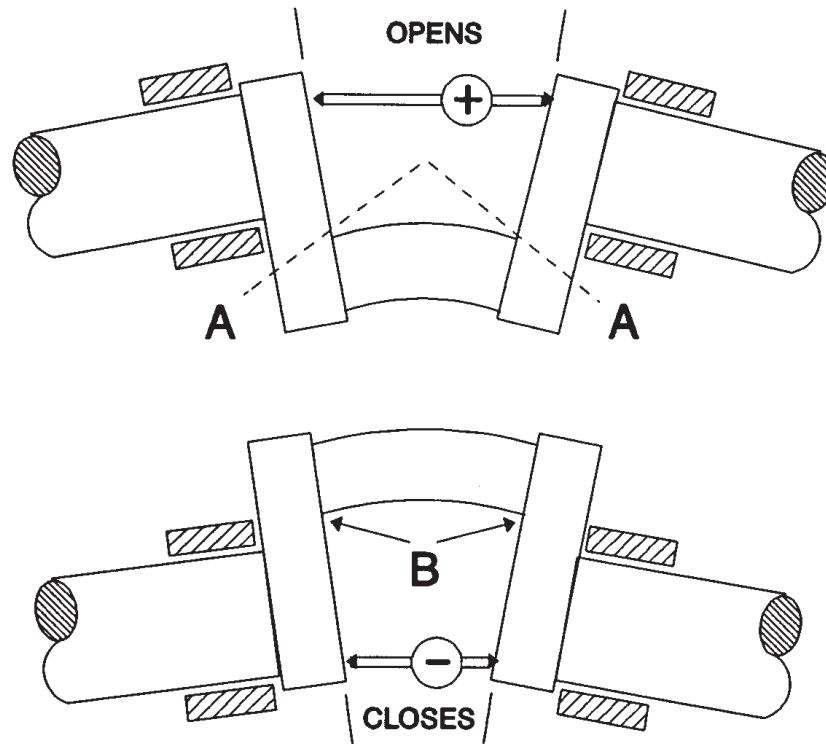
Out-of-Line Crankshaft Deflection
